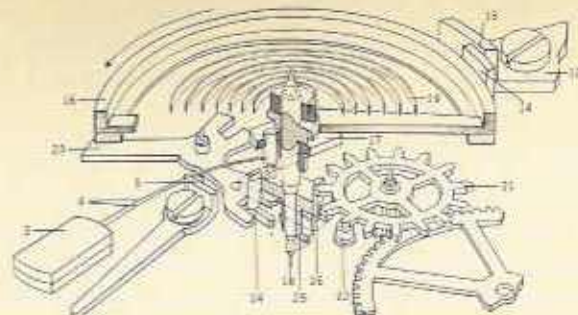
A greatly enlarged view shows the circuit closed. As the contact jewel (20) pushes the contact regulator (5), the drive jewel (26) advances the index wheel (21) one tooth further.
